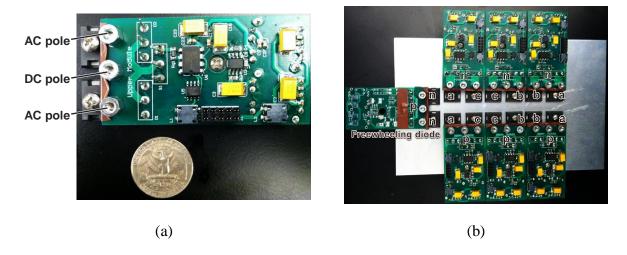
Gate drive board in the prototype: (a) Single board and (b) Assembled boards mounted on the heatsink.
